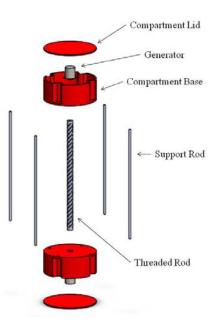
Exploded view of the general housing assembly showing the dynamo, the housing compartments, the support rods, and the threaded rods.
